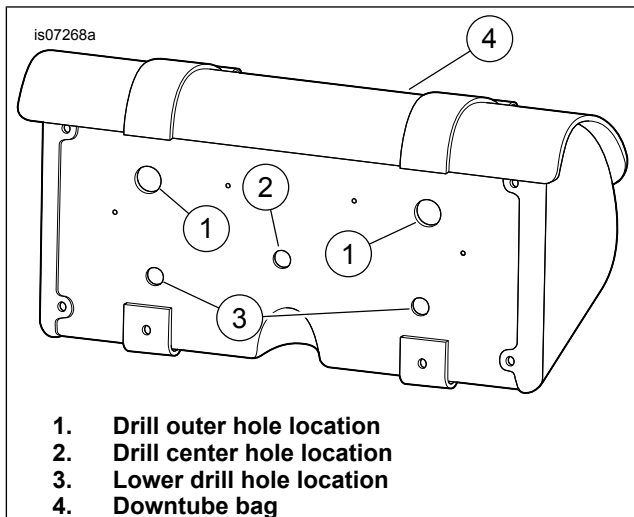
Drill Hole Locations for Dyna Models Without Engine Guard
